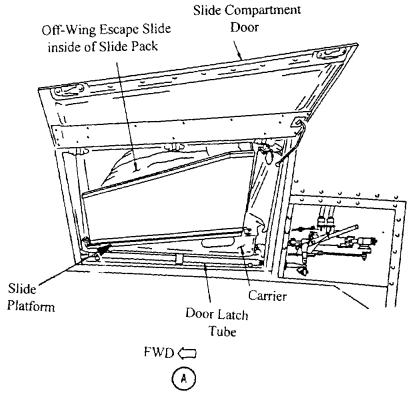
B-757 Off-Wing Escape Slide Assembly
